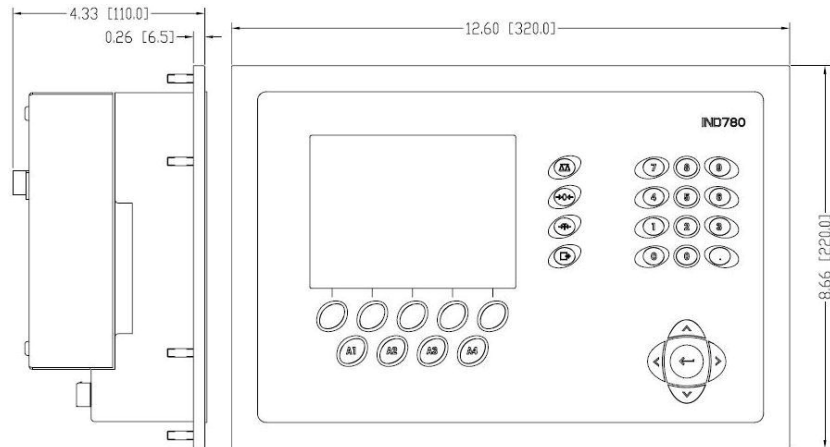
IND780 Panel Mount Terminal Dimensions
